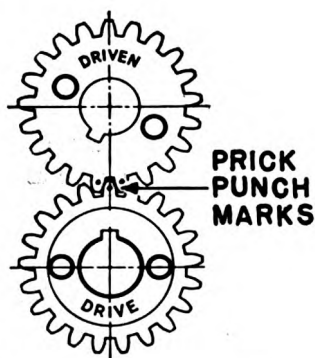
Synchronizing gears marked to avoid mistiming.
